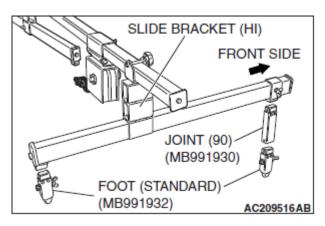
Supporting Engine Using Special Tool MB991895 Courtesy of MITSUBISHI MOTOR SALES OF AMERICA.
